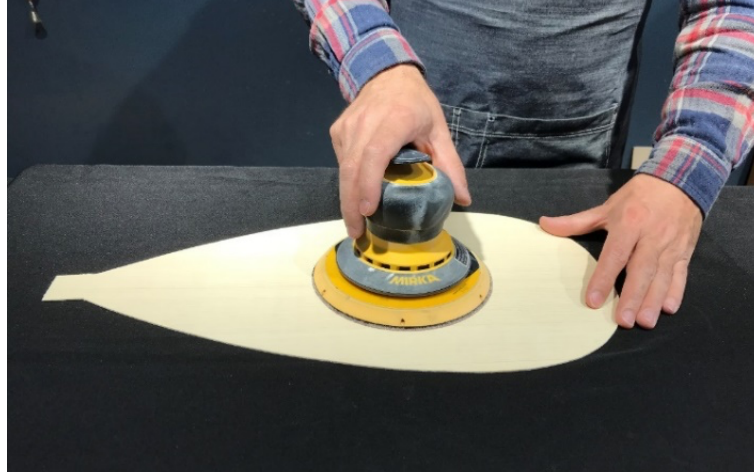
Making the surfaces of the soundboard smooth with a vibration machine
